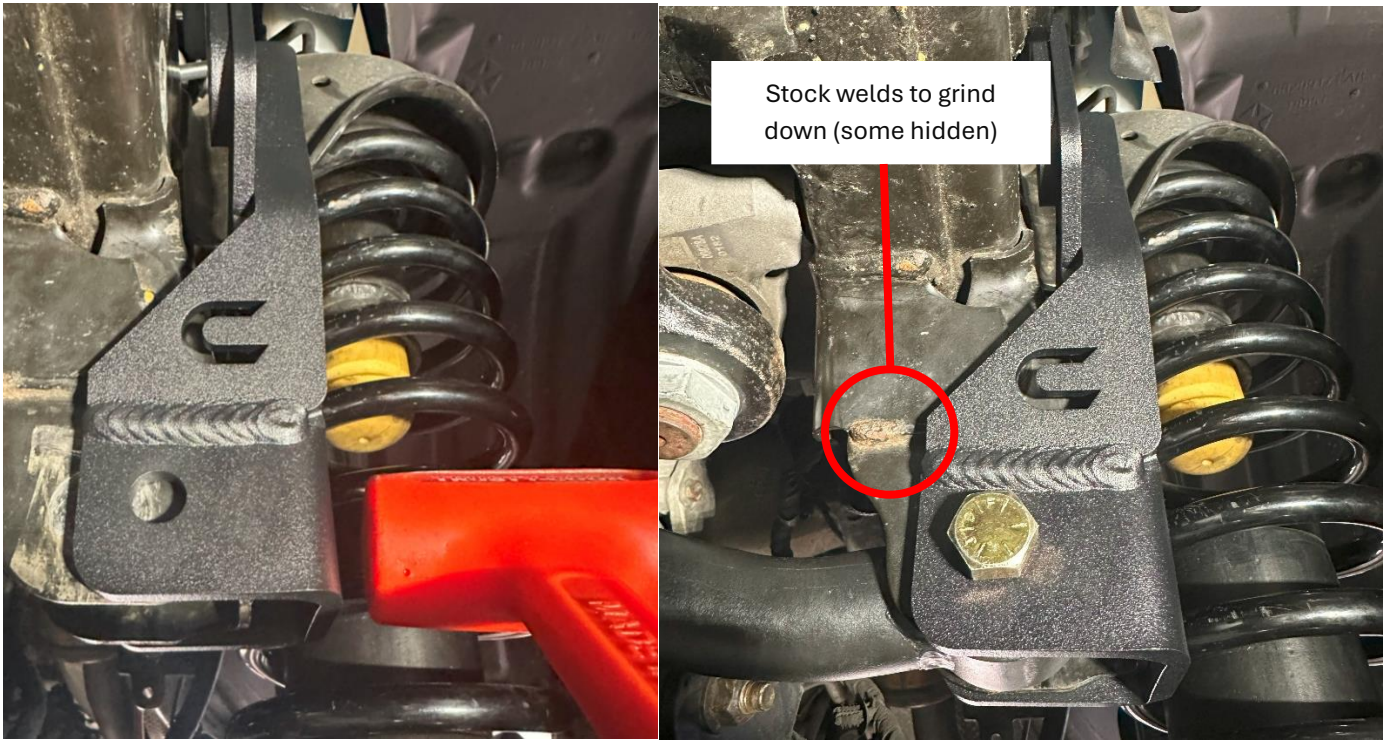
Track Bar Reinforcement Bracket with temporary track bar bolt installed
